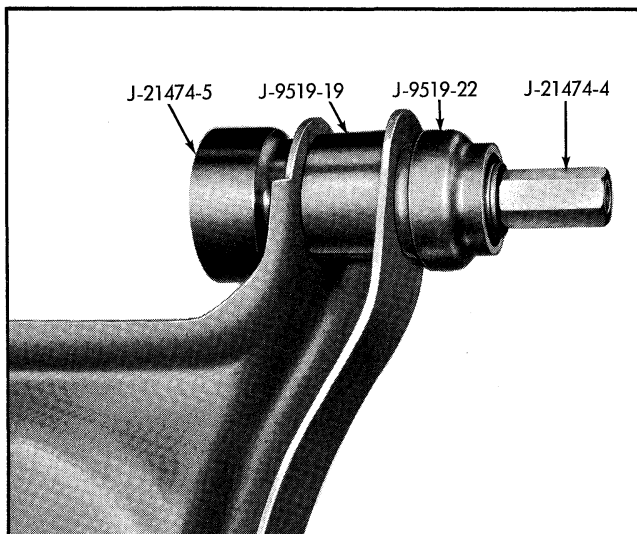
Installing Rear Bushing in Front Lower Control Arm
